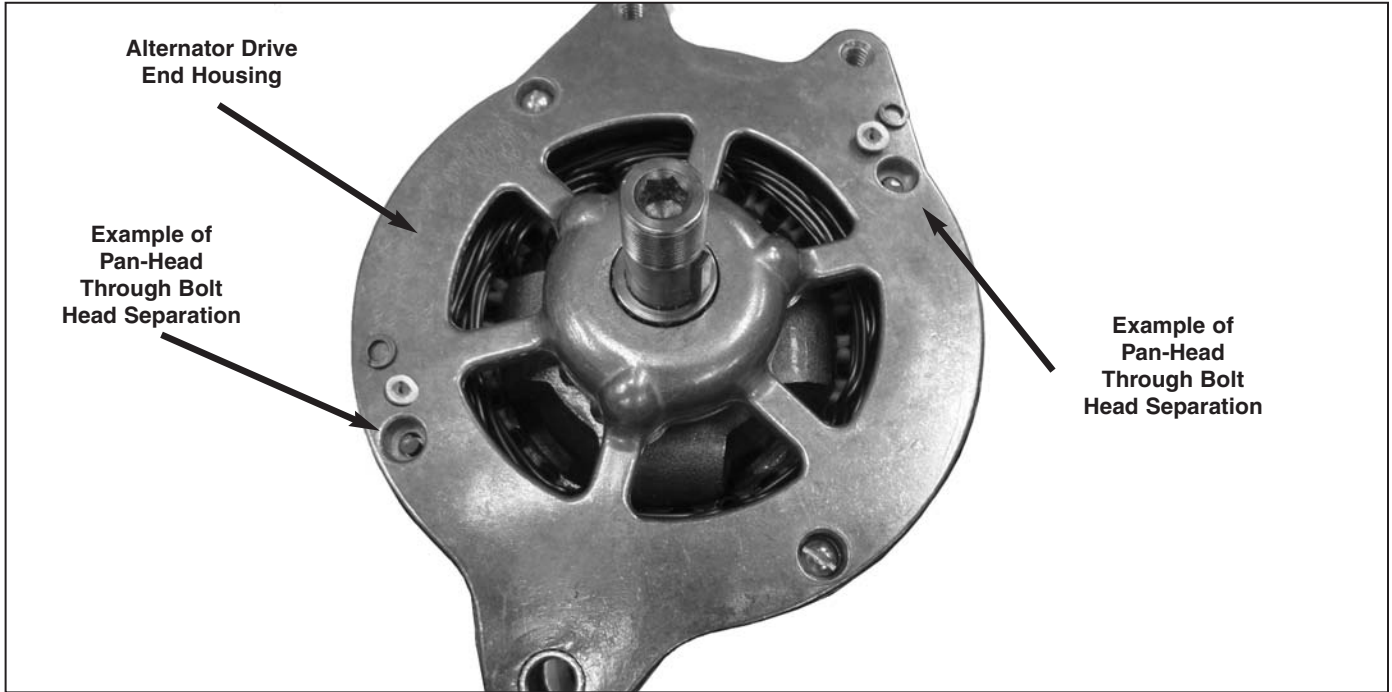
ALX-8521LS Pan-Head Through Bolt Head Separation Example Shown with Fan Removed.
